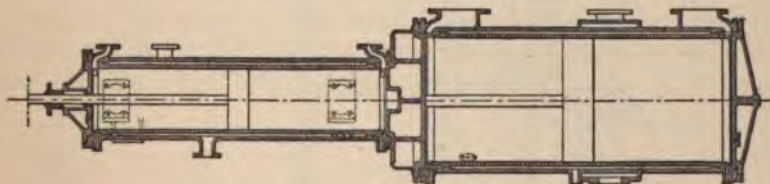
Davey's Horizontal Pumping Engine: Cylinders, Section. Scale 1/72d.
